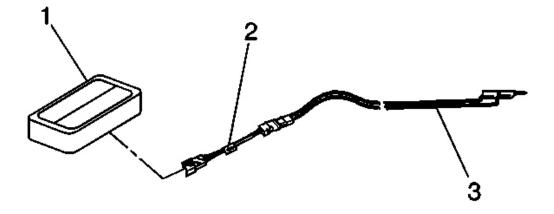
Extending SIR Deployment Harness & Adapter Courtesy of GENERAL MOTORS CORP.
